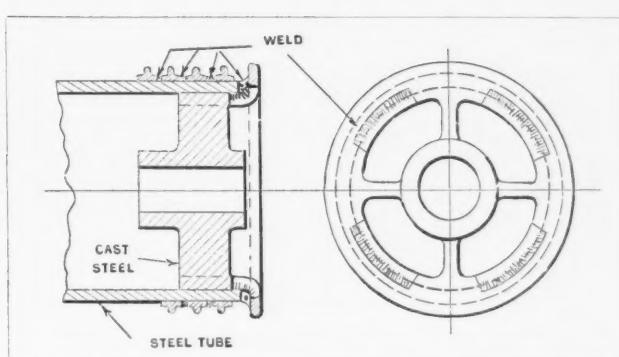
Diagram Showing Proposed Construction of Welded Steel Drum
